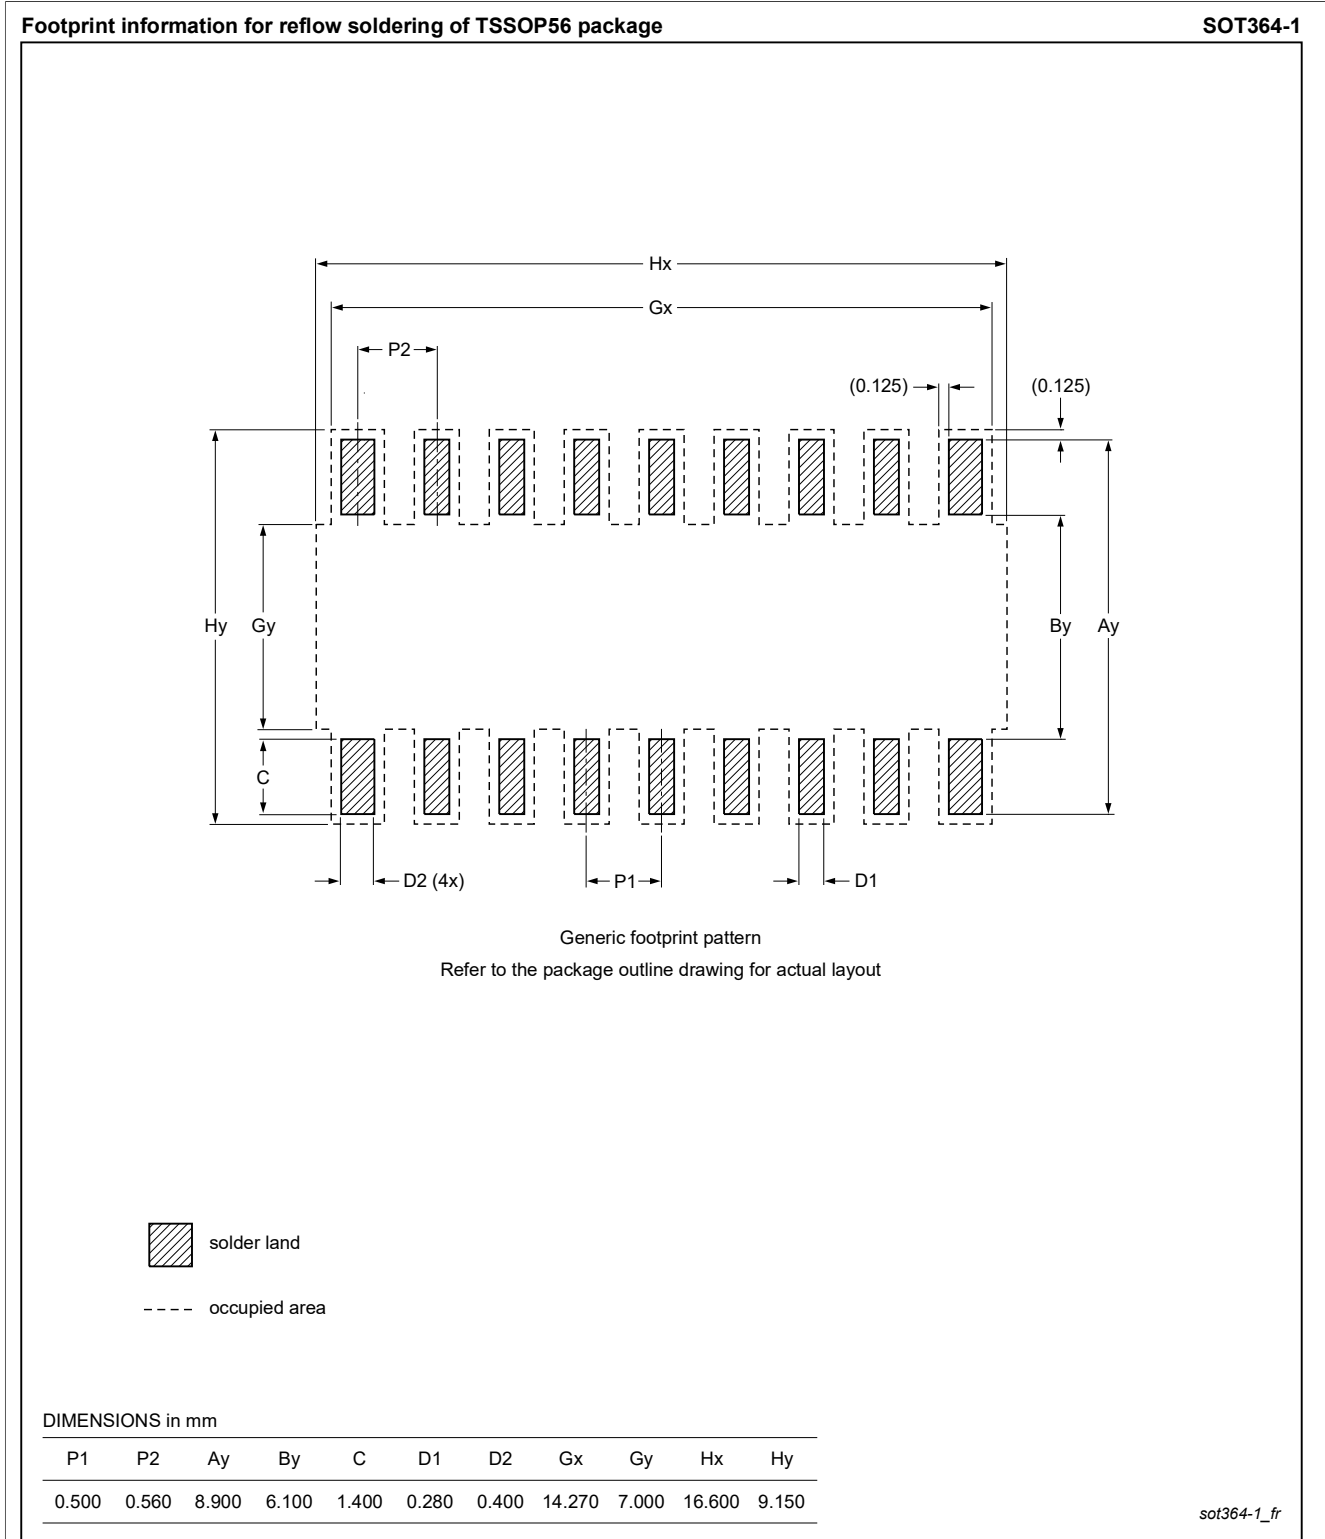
Footprint information for reflow soldering of SOT364-1 (TSSOP56) package
